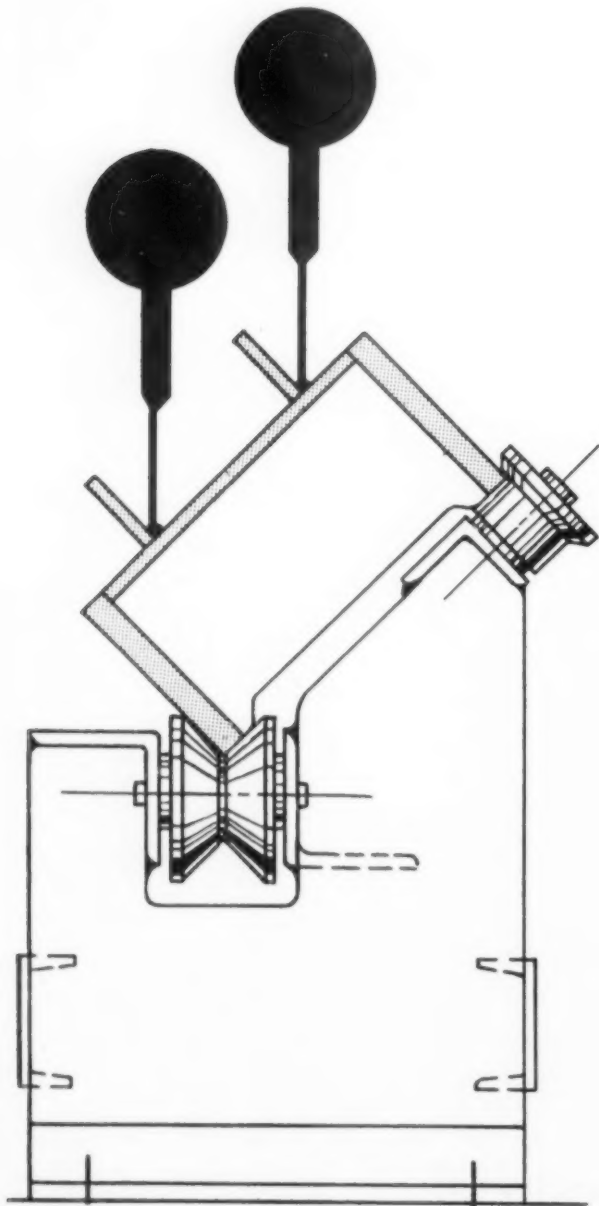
, above, tilting fixture used to assemble keels, (Stas. 16 and 18) which are located by means of gages, shown in place on the workpiece.
